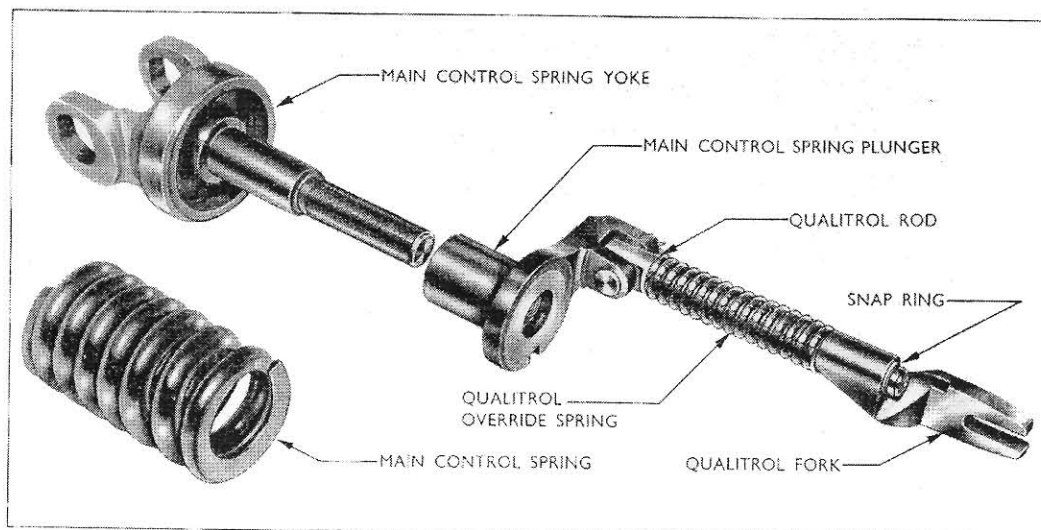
Qualitrol Link, Spring and Plunger Assembly
